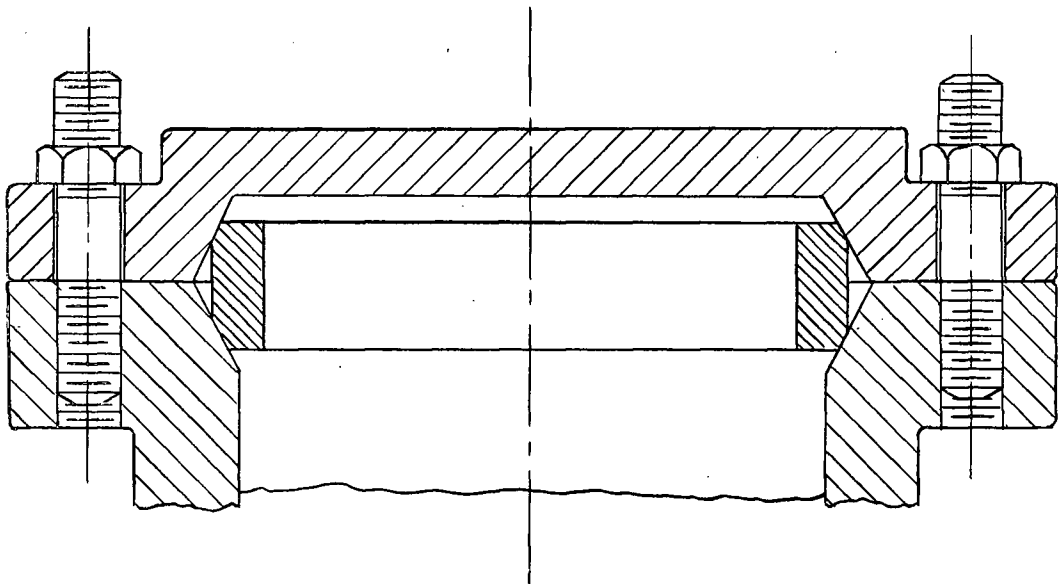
The Double-Cone Ring Gasket in the Assembled State
